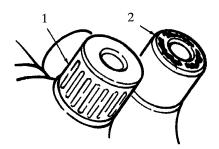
Inspect Cross Bearing Surfaces and End Surfaces
